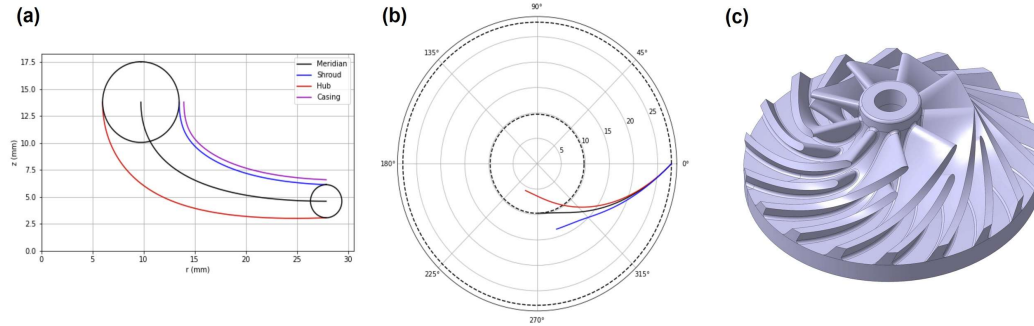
Wheel geometry obtained by preliminary design method: (a) Meridian view, (b) Front view, and (c) 3D geometry
